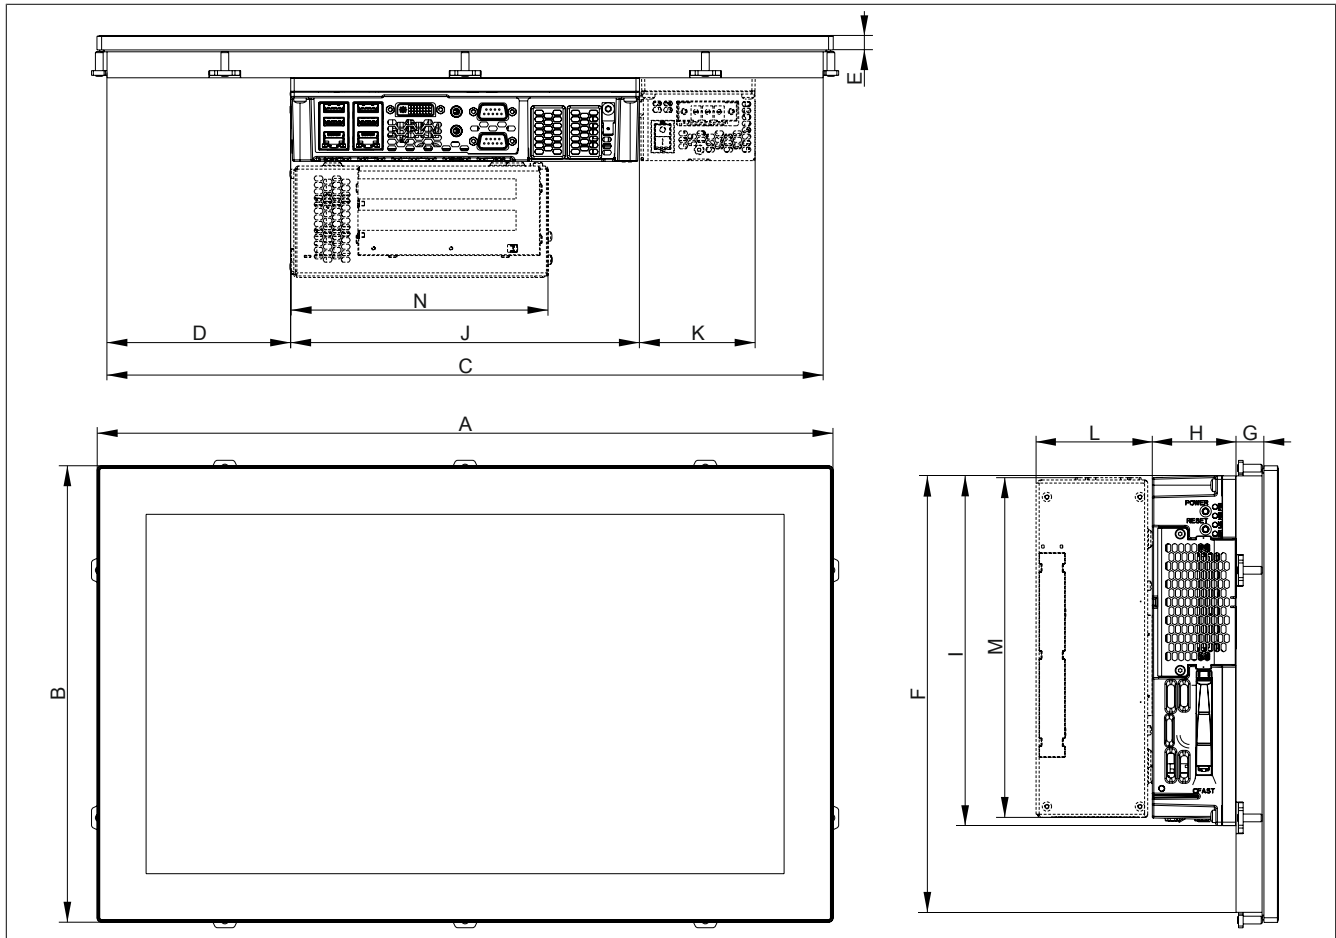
Panel PC 900 + power supply + bus units - Dimensions
